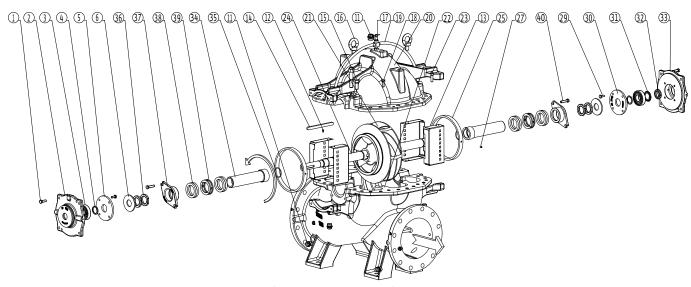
Exploded view of Atmos TERA-SCH hydraulic (version with gland pack)
